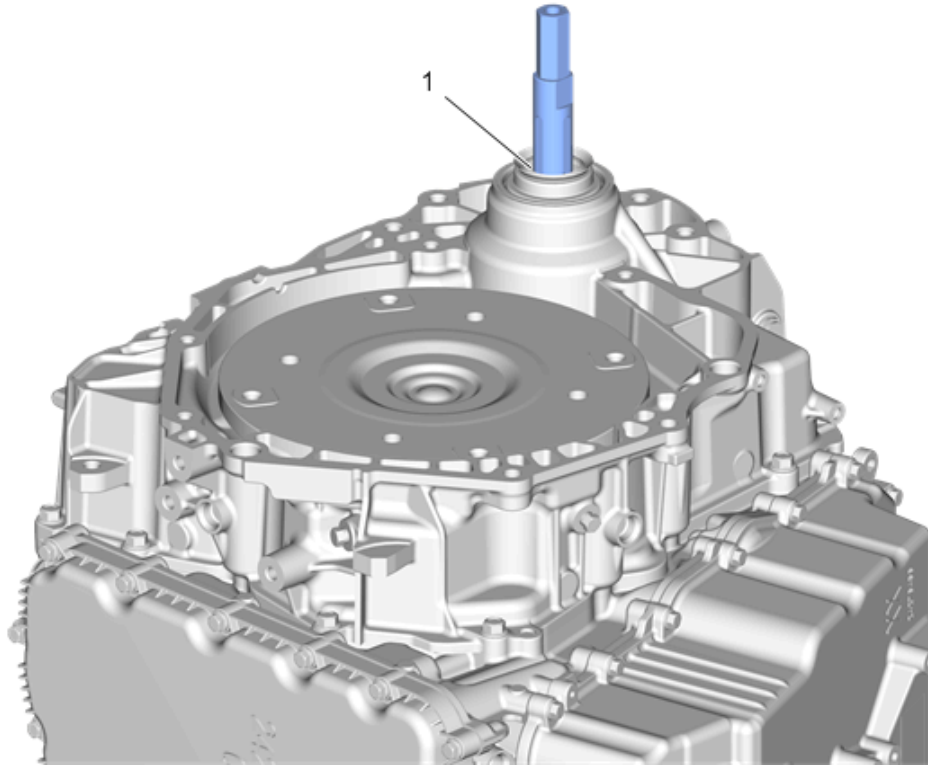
Front Differential Carrier Final Rotational Torque Measurement
